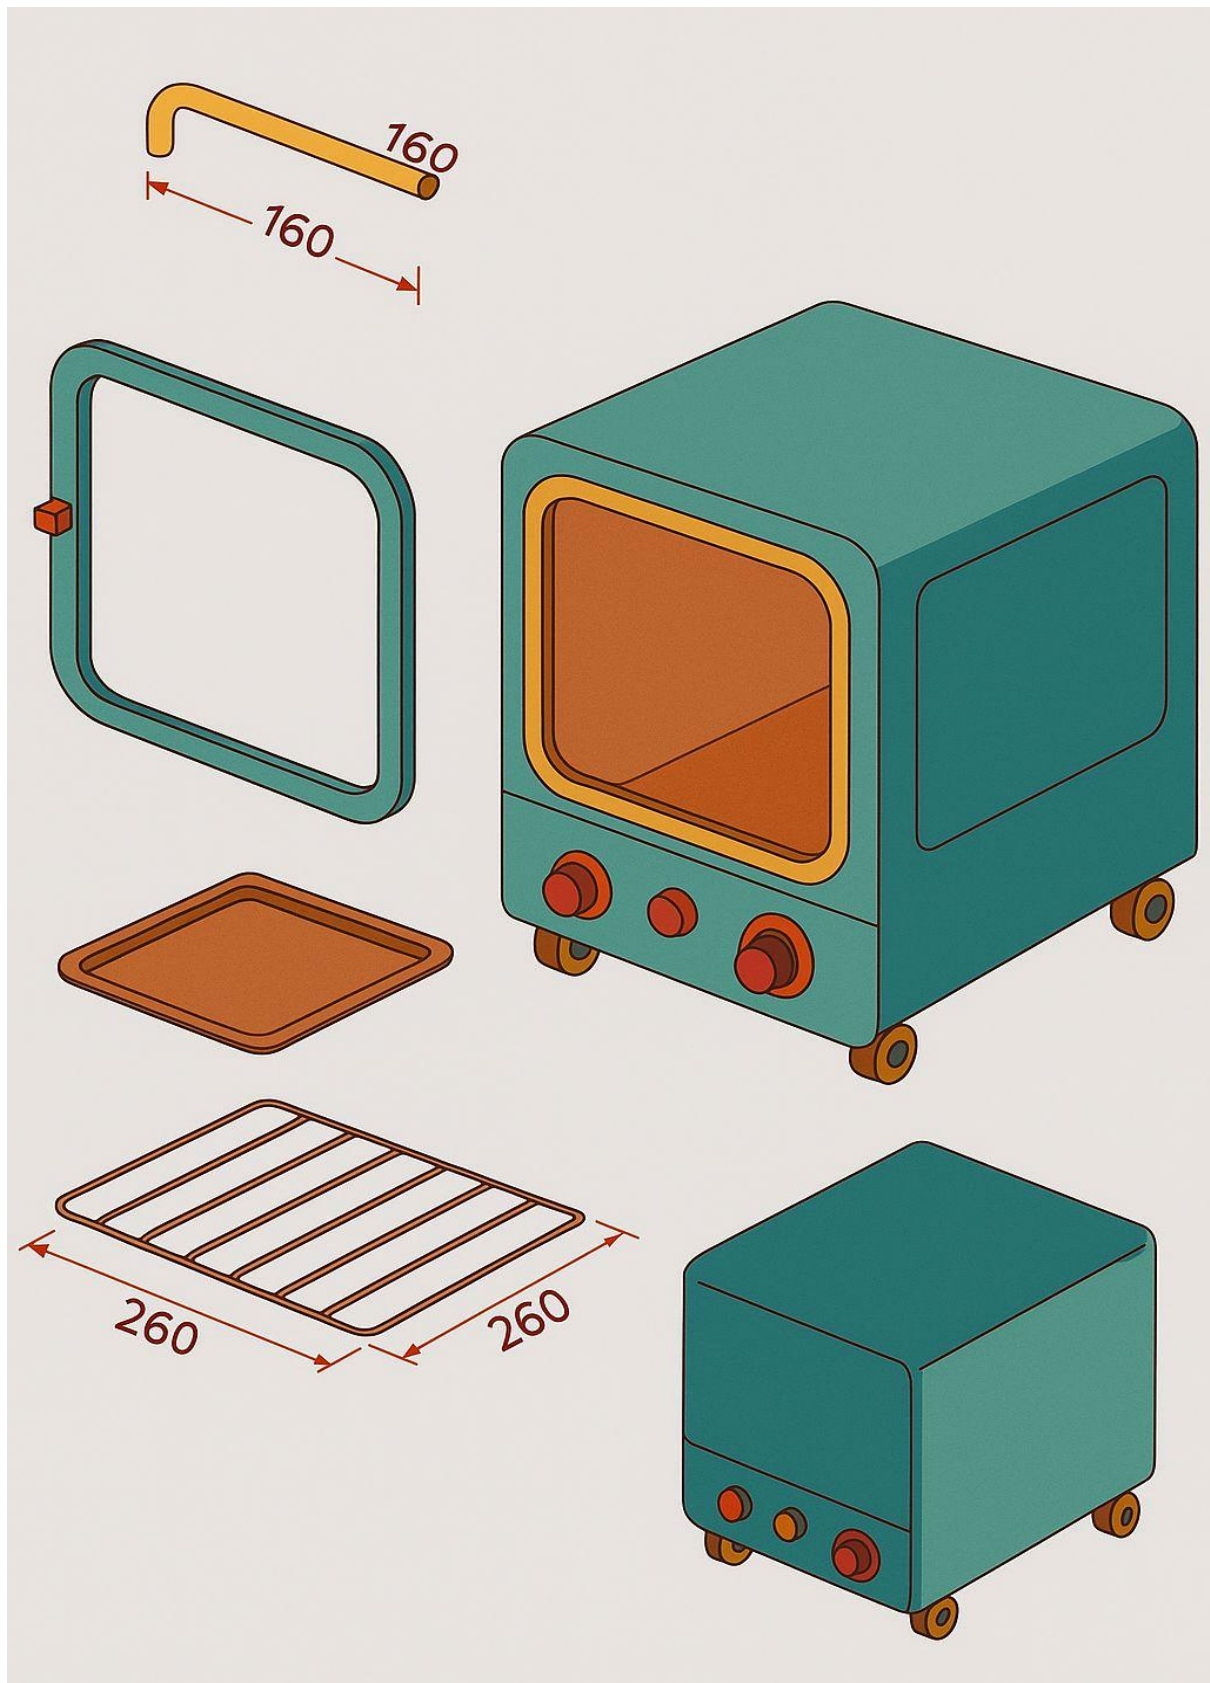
Multipurpose Gas-Powered Oven (Assembly Drawing II)
